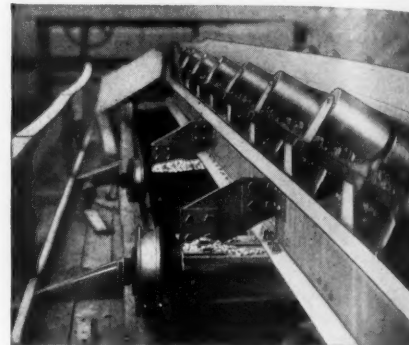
Shuttle conveyor with ball-bearing equipped wheels
